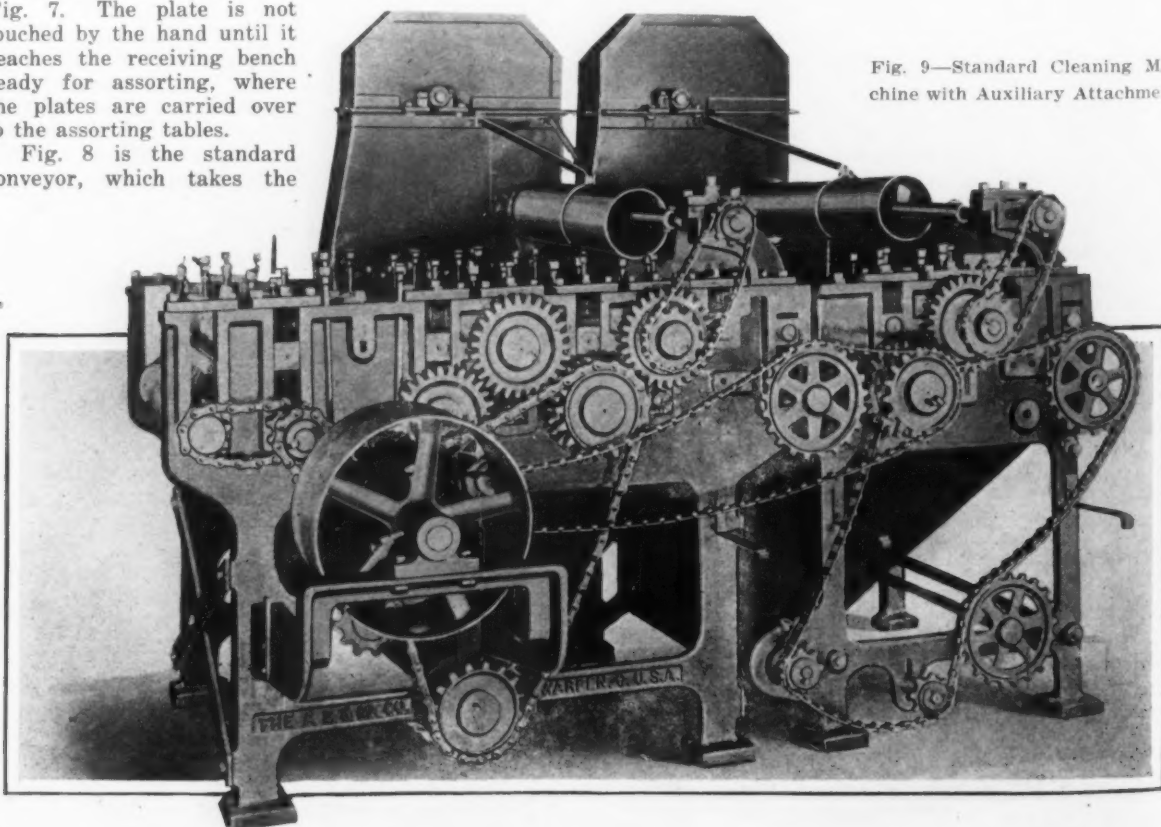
Standard Cleaning Machine with Auxiliary Attachment
